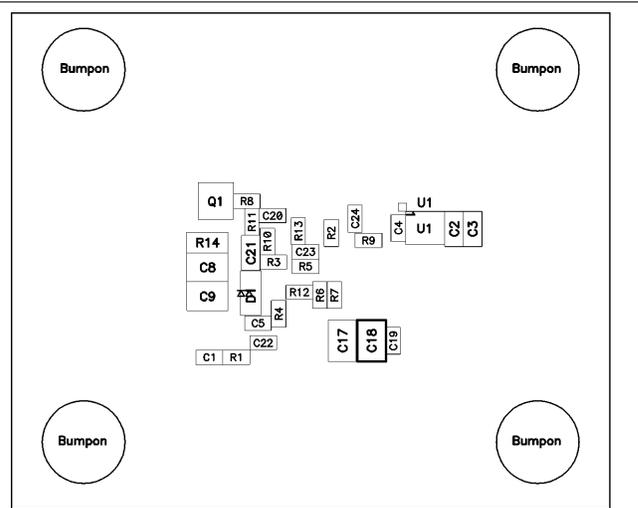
Bottom Assembly Drawing (Bottom View)
